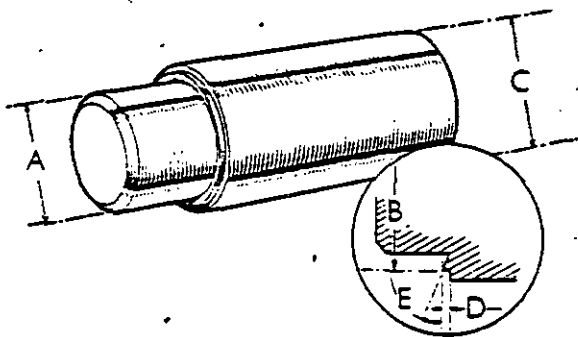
TOOL FOR FITTING 620070 NEEDLE ROLLER BEARING
